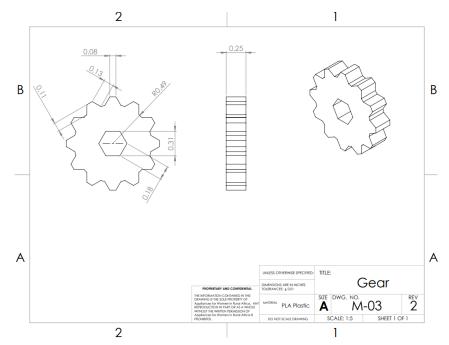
Gear dimensions (see Appendix G, Figure G17).
